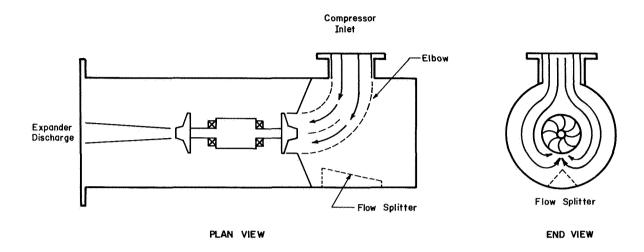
Cutaway drawing of turboexpander/compressor, illustrating inlet modifications.
